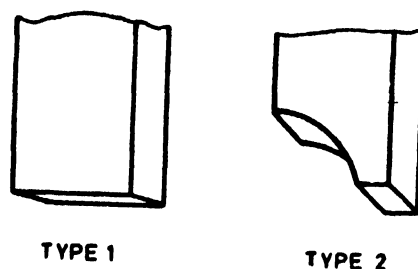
TYPES OF VERNIER DEPTH GAUGE
